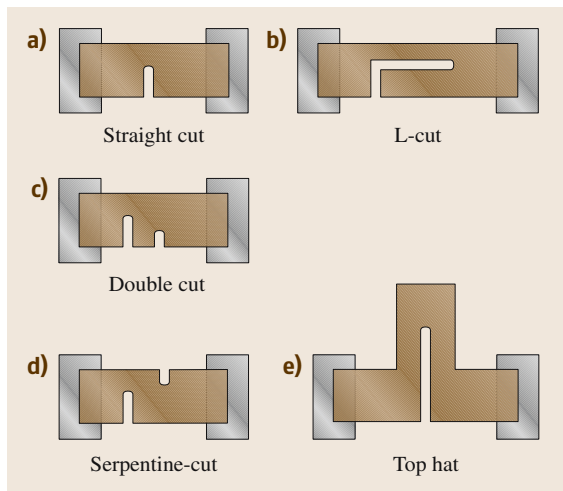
e Examples of trim cuts for resistors (a) Straight cut (b) L-cut (c) Double cut (d) Serpentine cut (e) Top hat
